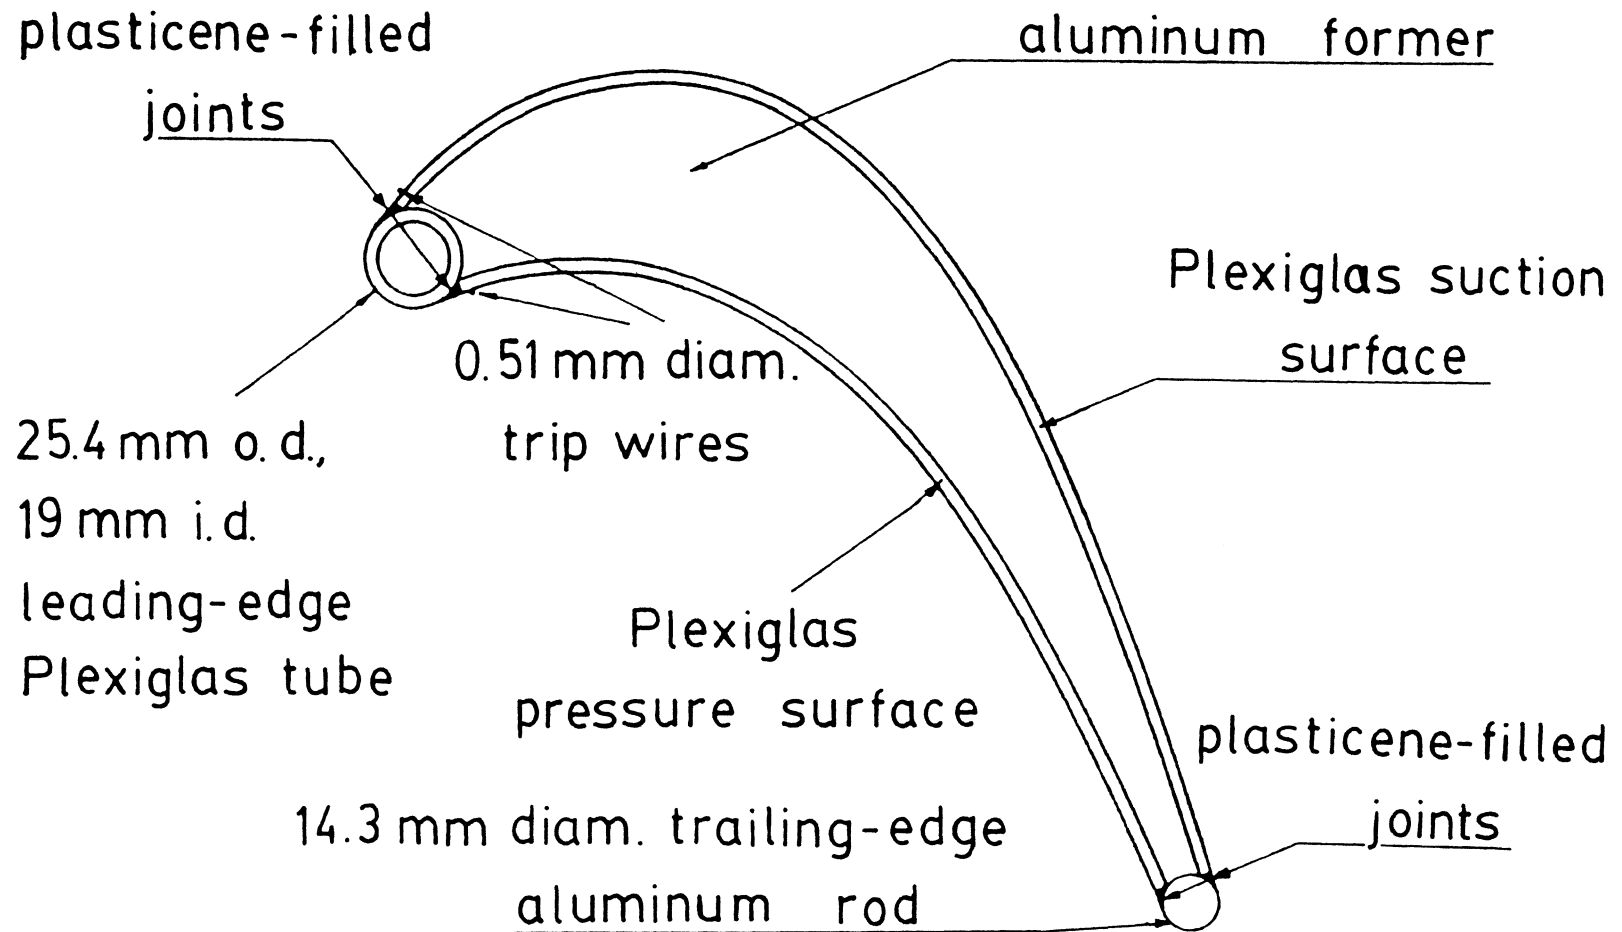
Cross-section of Turbine Blade Showing Details of the Blade Construction.
